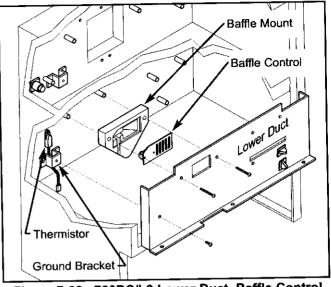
700BC/I-3 Lower Duct, Baffle Control Assembly and Freezer Compartment Thermistor
